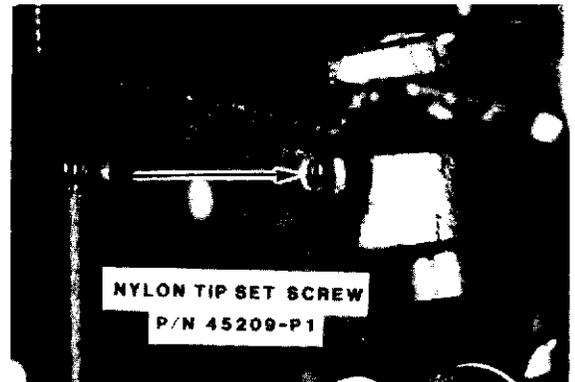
REMOVING SOUND OPTICS SETSCREW
